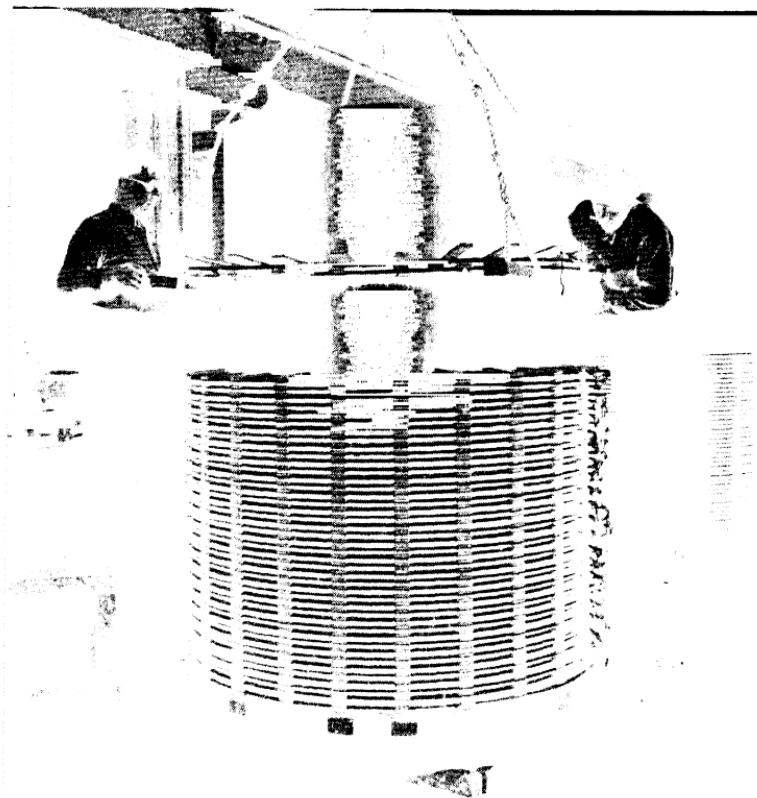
Assembling disk coils for a power transformer. (*Courtesy of General Electric Co.*)
